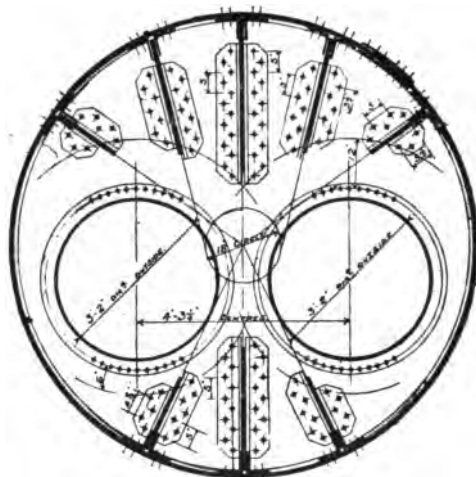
Method of staying back end of a Lancashire type boiler.
